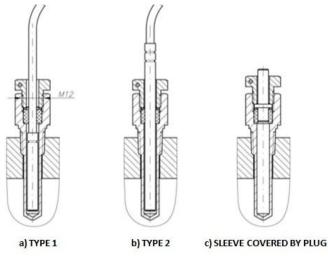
The PT1000 thermo probes assembled in the body of CGT-02 Turbine Gas Meter manufactured by COMMON S.A.
